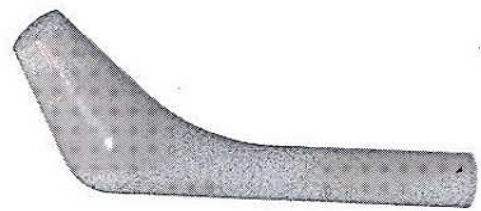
CAD model of the preform - forging, for preforming forging operation
